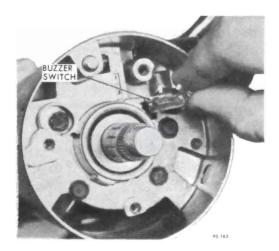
Installing Buzzer Switch Clip and Switch
